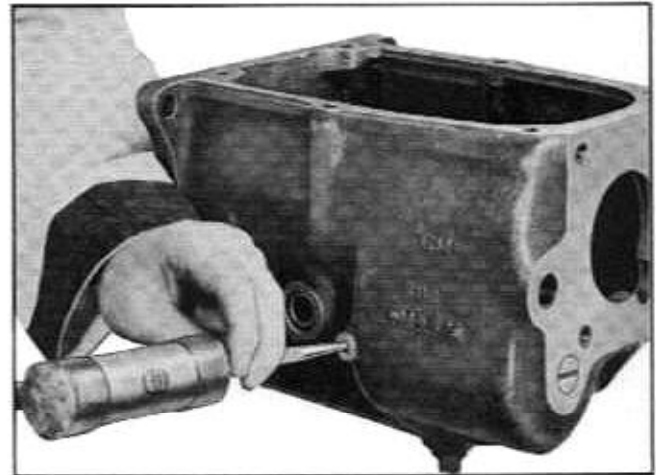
Driving Reverse Idler Gear Shaft Lock Pin Into Shaft
